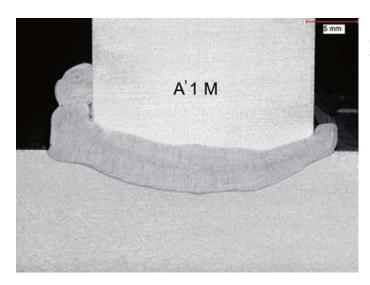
Macro section of a flawless stud weld (© Trillmich)
